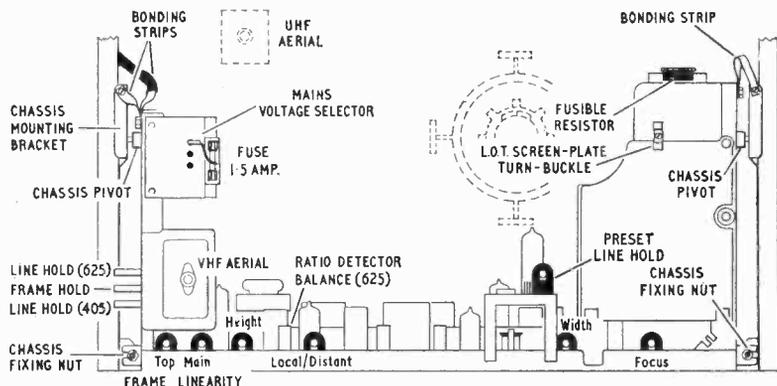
Preset adjustments. Flywheel unit with preset line hold on fringe models only.
